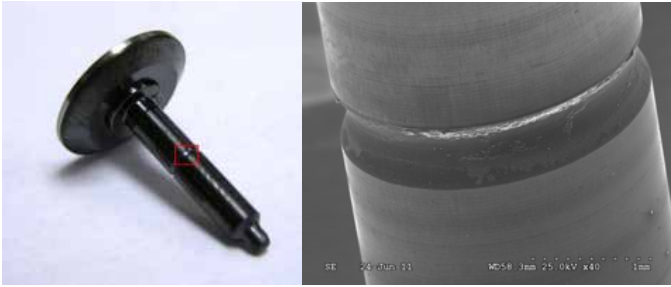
Diesel Metering Valve with deposits (Courtesy BNSF)
